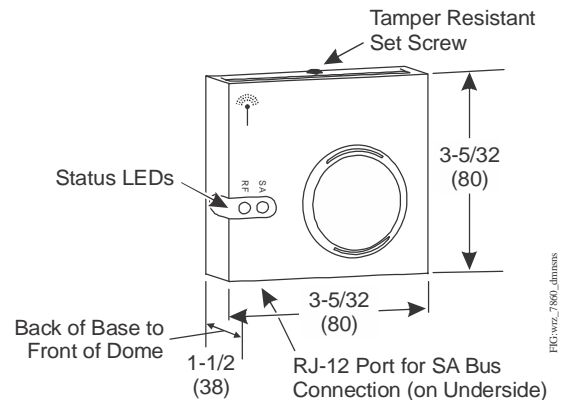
FX-WRZ7860-0 Receiver Physical Features and Dimensions, in. (mm)
